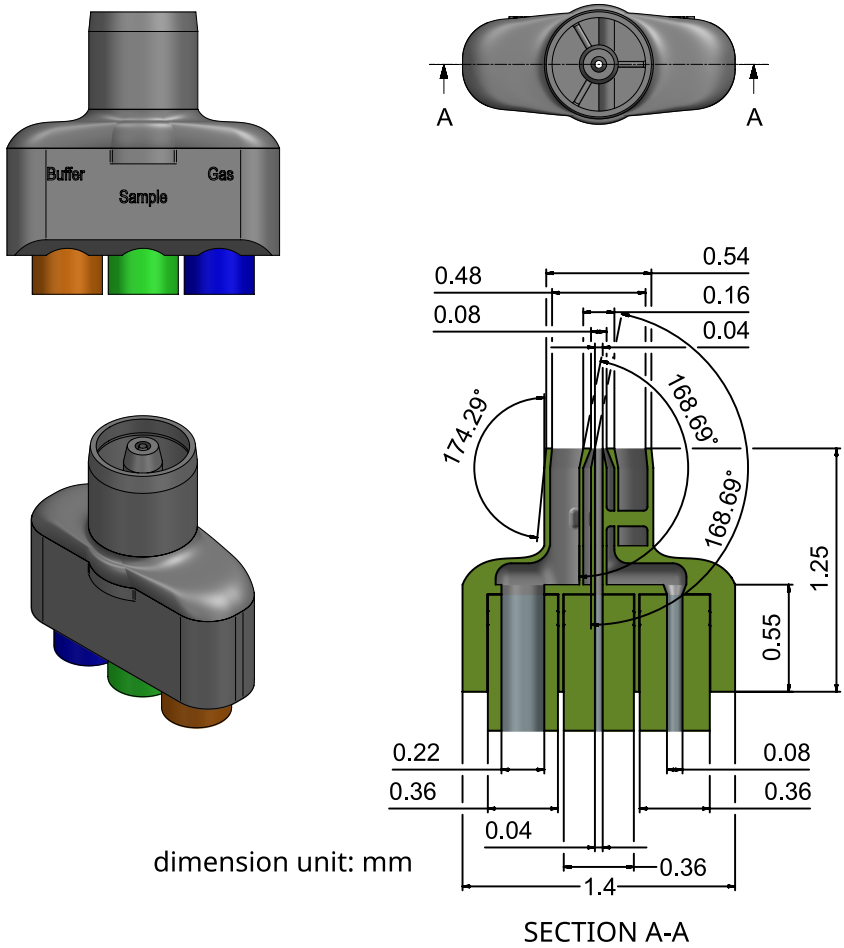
CHeES nozzle design. Renderings and technical drawing to nozzle dimensions, inlets, and outlets. Dimensions in millimeter.
